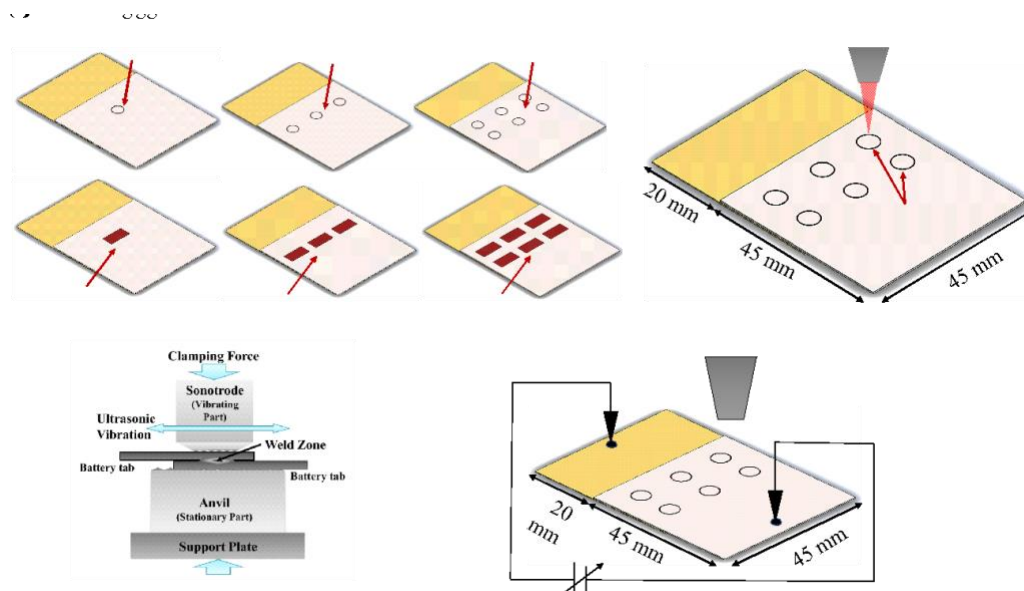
Schematic of (a) laser welded samples, (b) ultrasonic metal welded samples, (c) ultrasonic welding, (d) laser welding, and (e) resistance and temperature measurement set-up.
